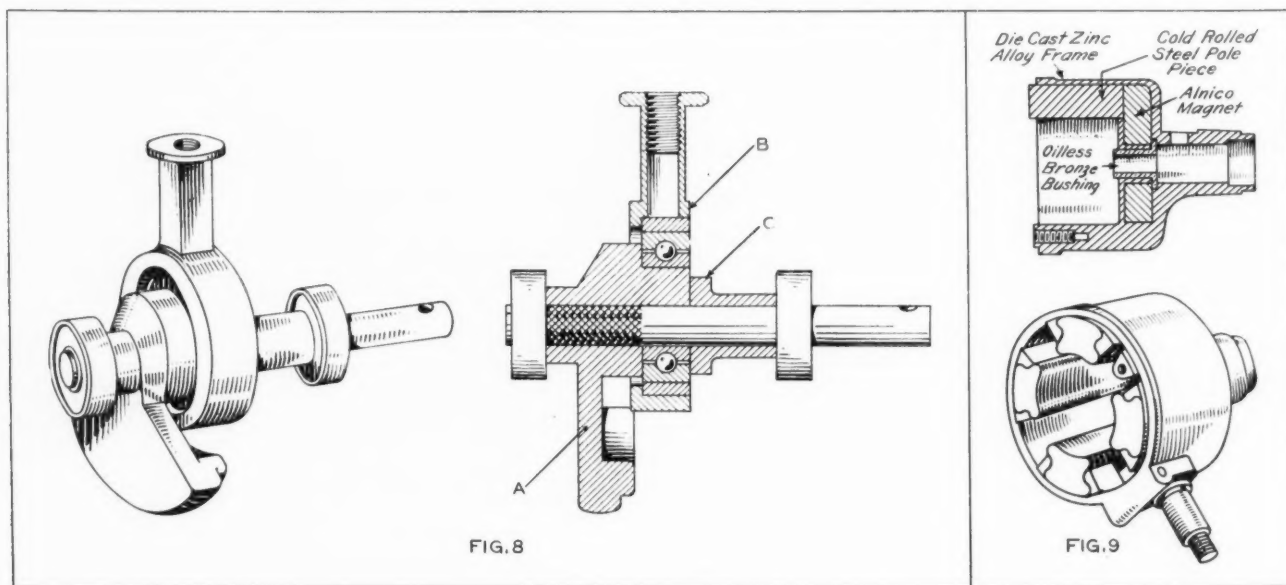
Three Separate Zinc Alloy Die-castings are Assembled to Form the Eccentric Shaft, Connecting-rod, and Other Parts of a Light Air Compressor. The Steel Shaft is Cast in Place in the Hub, which Has an Eccentric Boss, over which the Ball Bearing of the Connecting-rod Fits
